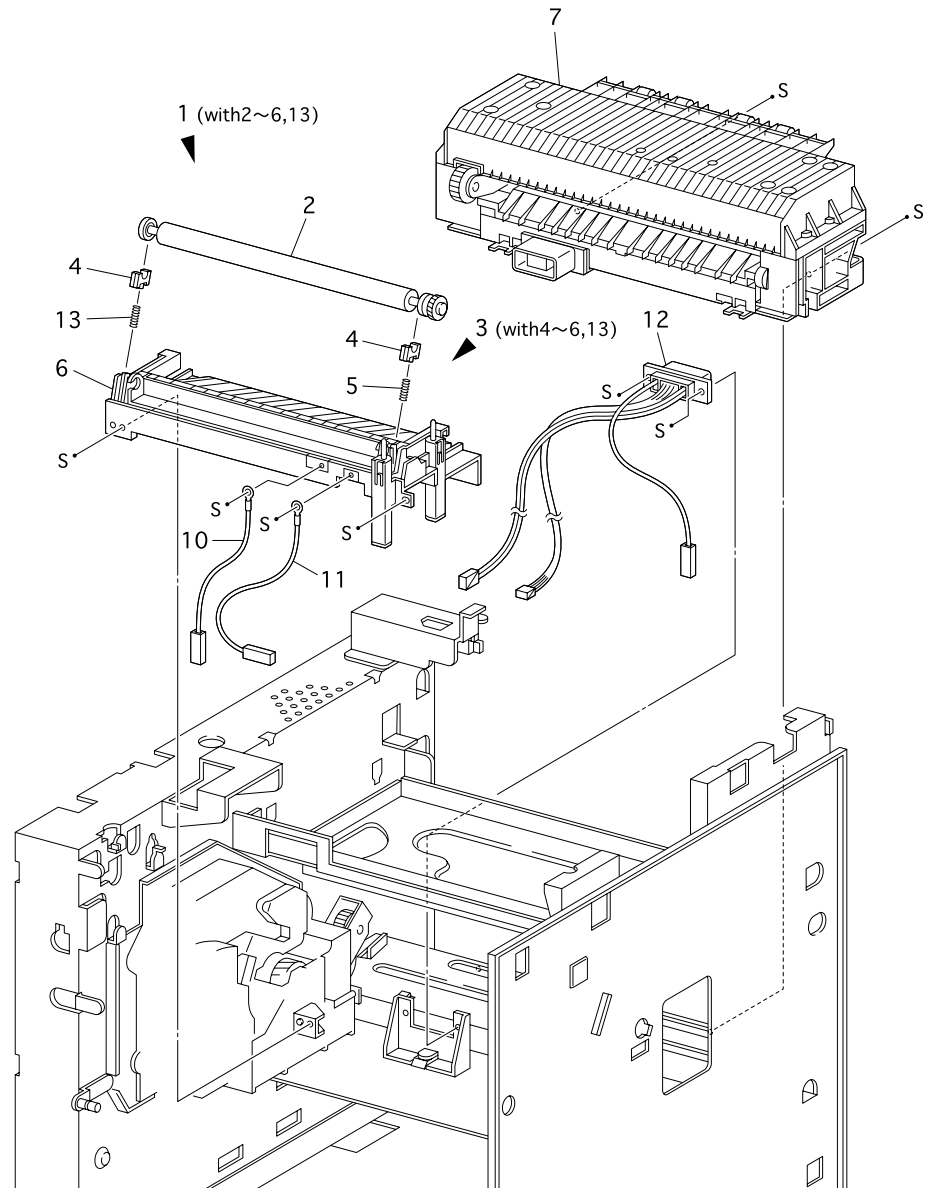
Exploded Diagram for Chute Trans & Fuser
